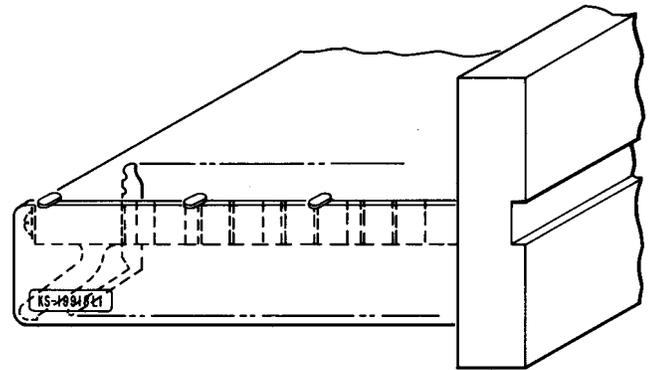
Method of Mounting KS-19918, L1 Guard on Terminal Strips
